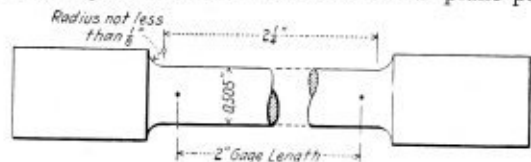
Standard form of test specimen required for all tension tests of steel seamless hollow-forged material
